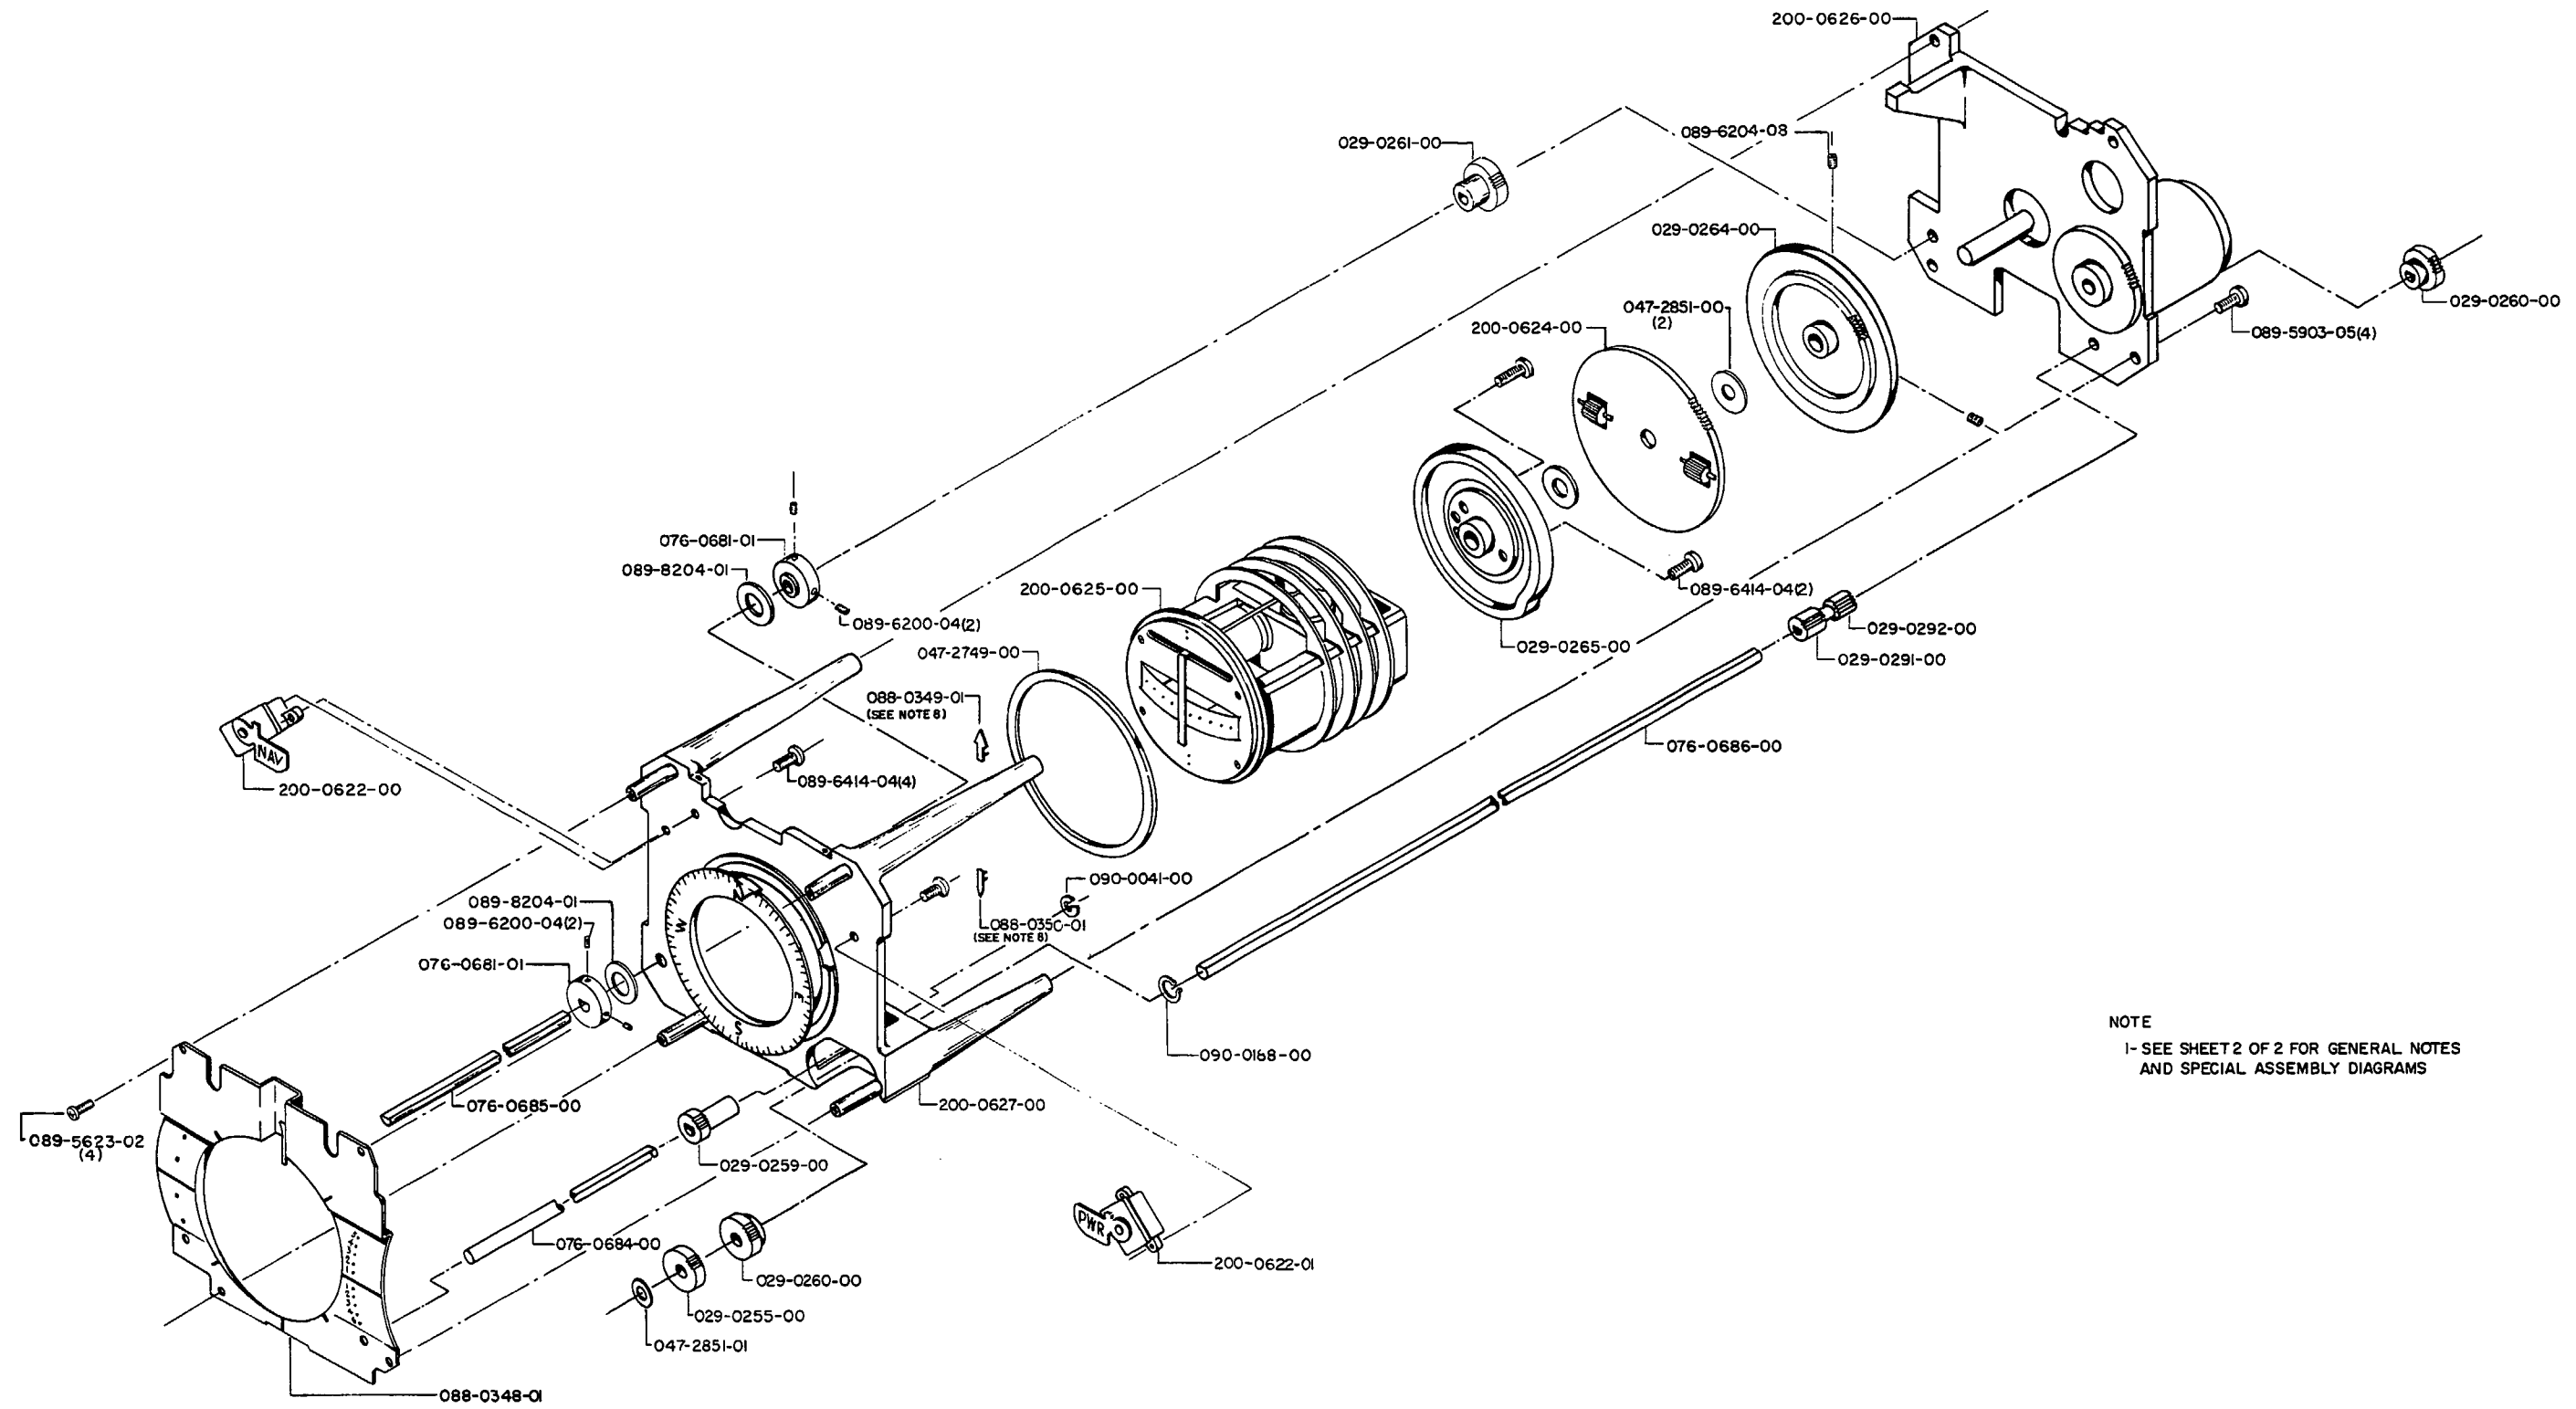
KI 525 FRONT DISPLAY ASSEMBLY
